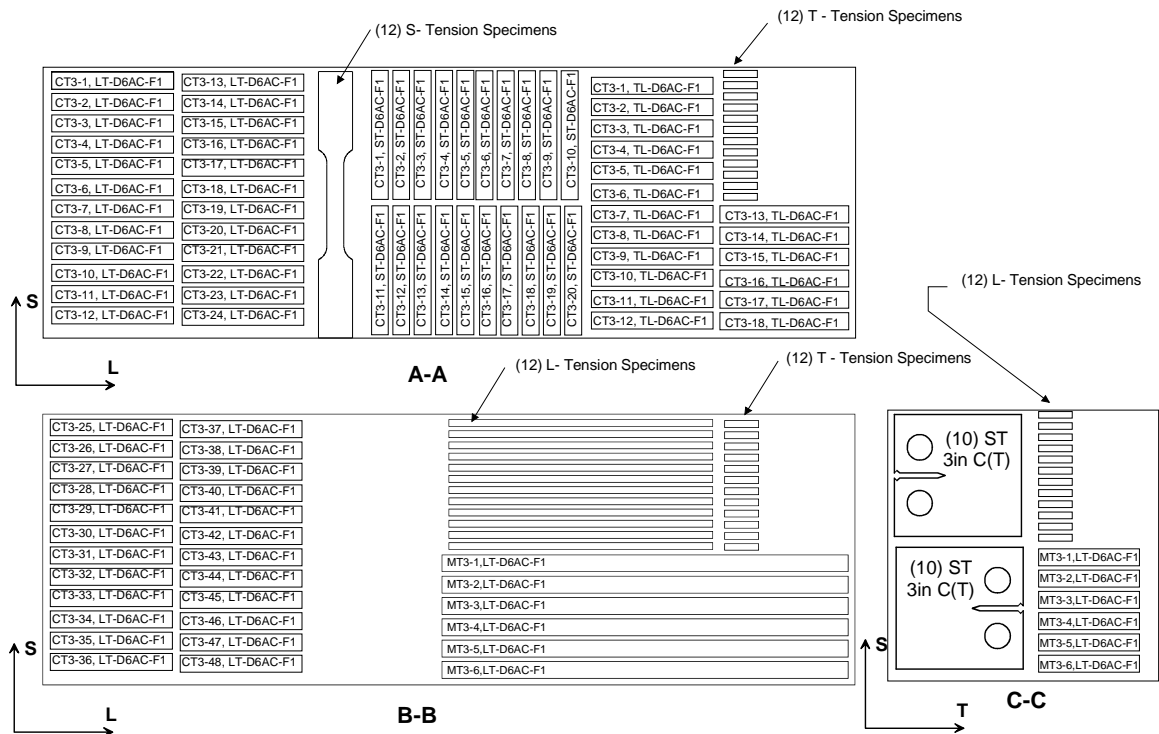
Numbering Layout for the Fracture and Tension Specimens
